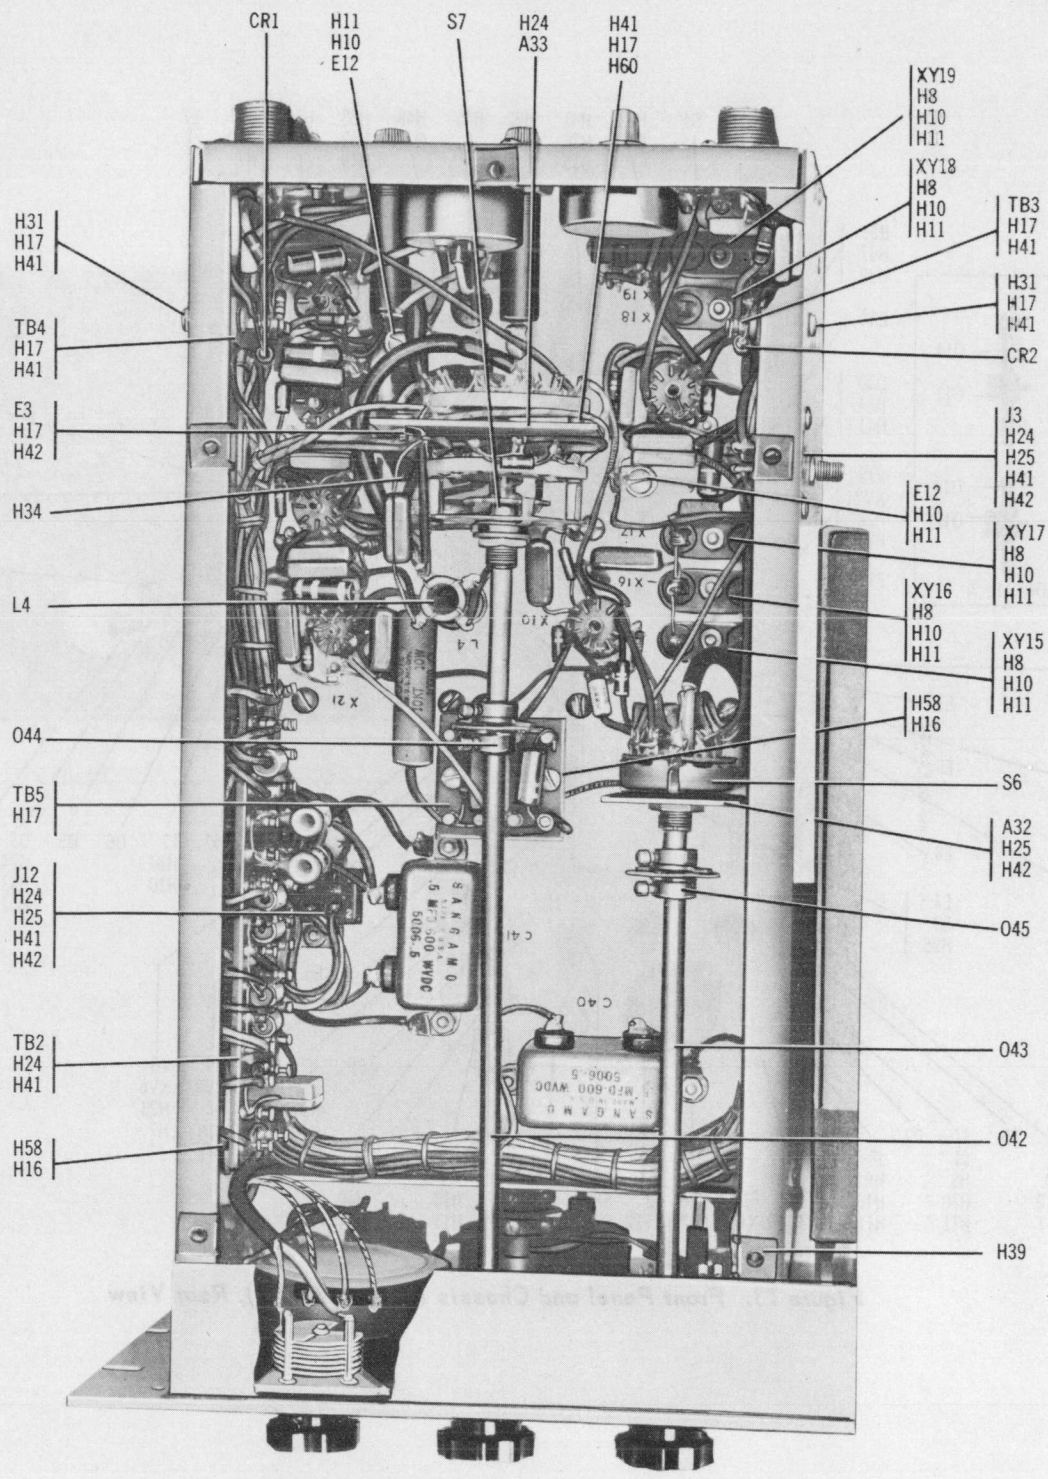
Front Panel and Chassis Assembly (E37), Chassis Bottom View
